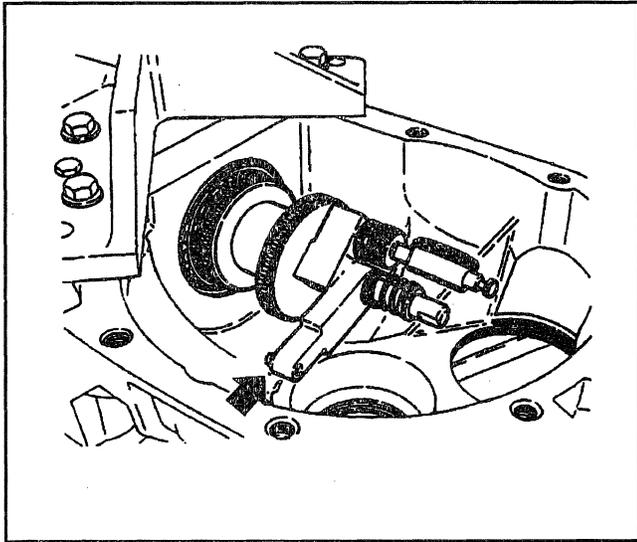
Measuring Pinion Depth—Button Moved Out of Bearing Bore
